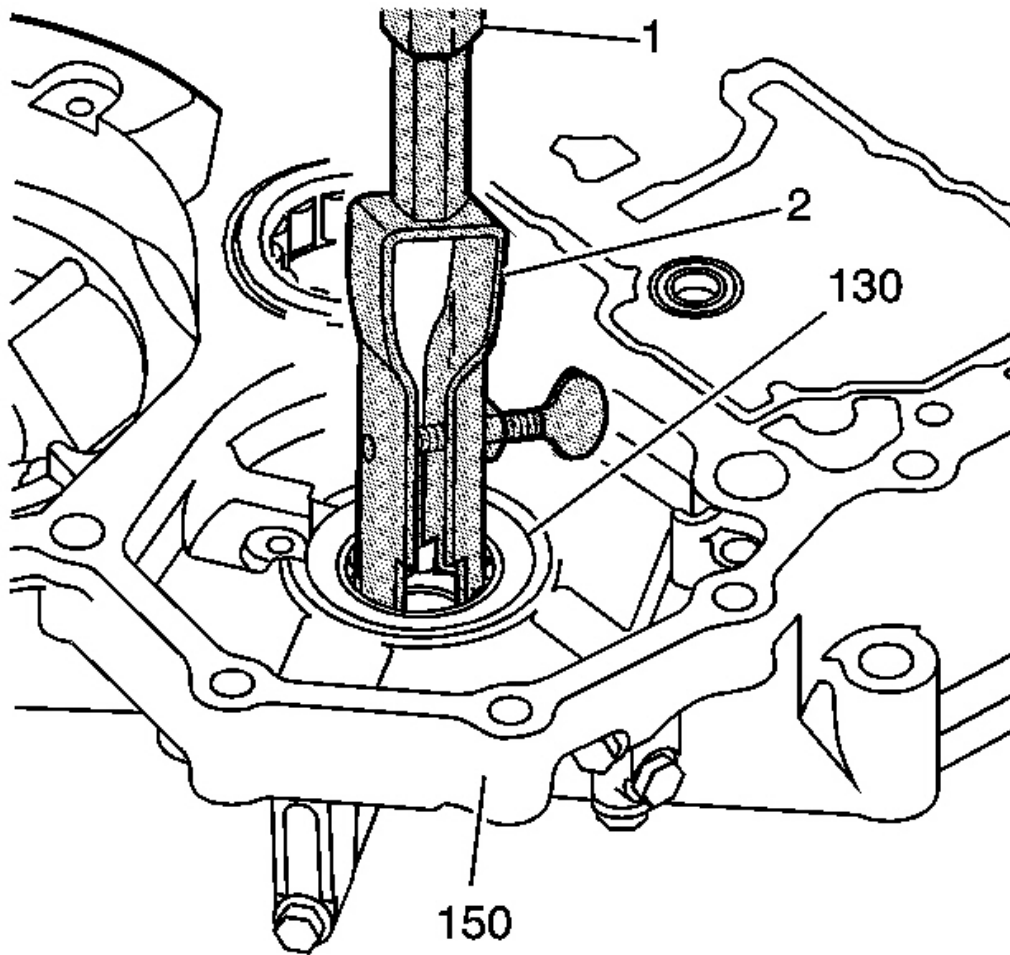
Clutch Shaft Intermediate Bearing & Torque Converter Housing
